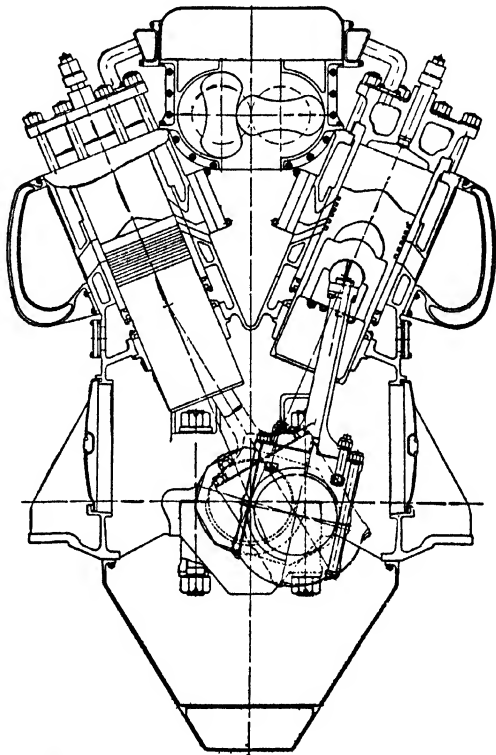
Section of Busch-Sulzer two-stroke cycle V-type medium high-speed Diesel engine.
